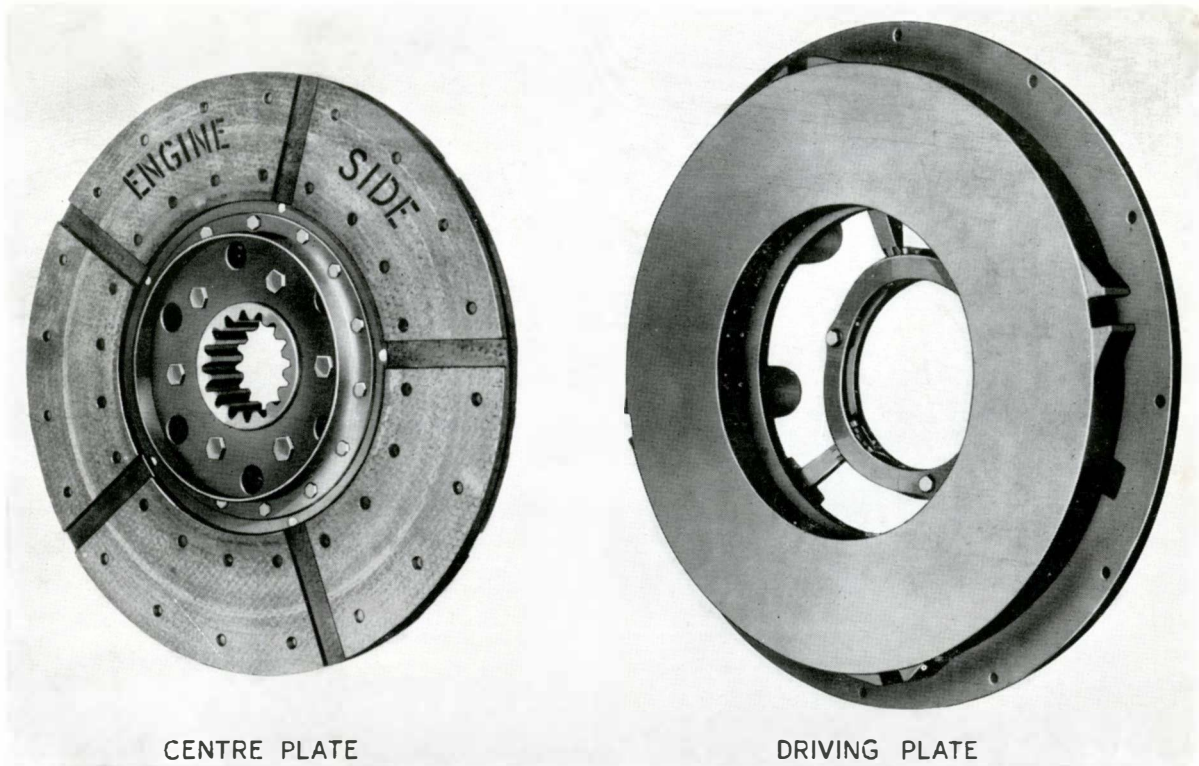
CLUTCH SUB-UNITS VIEWED FROM ENGINE SIDE
